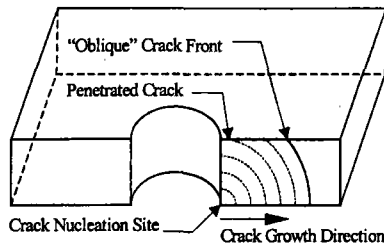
Crack growth profile at mechanical fastener holes⁽²⁾
